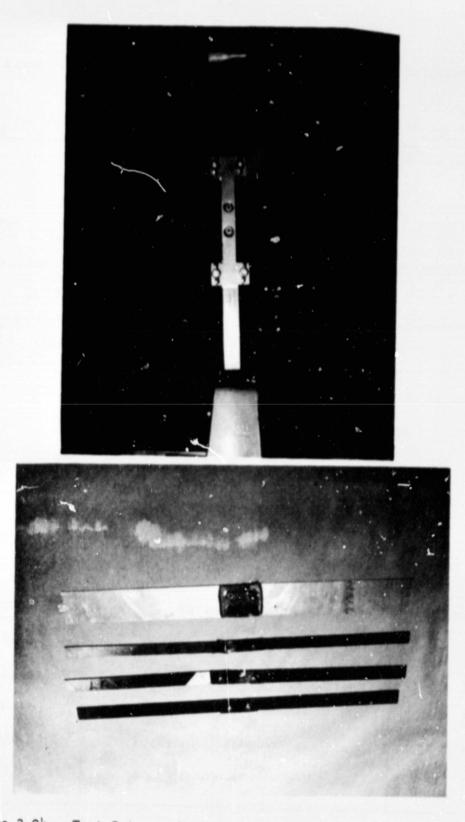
Test Setup and Typical Failure Modes for Mechanical Joint Specimens (Item 16B)
